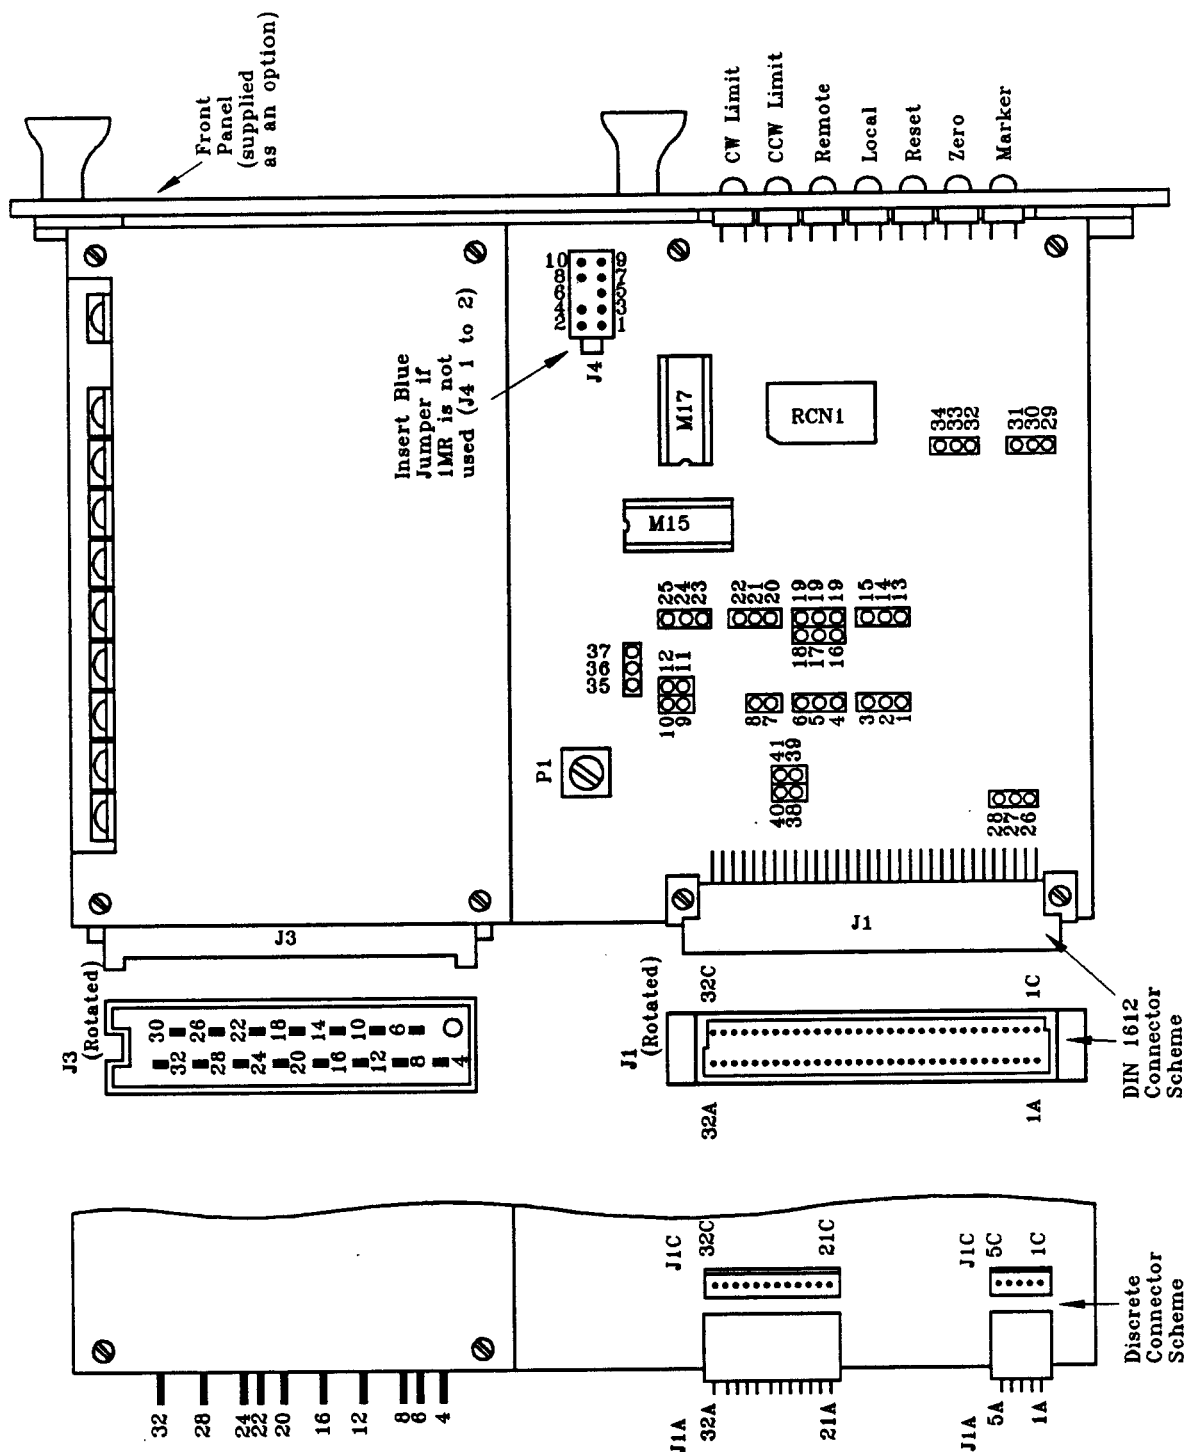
Assembly Outline of DM4005/4003/4001/1501
